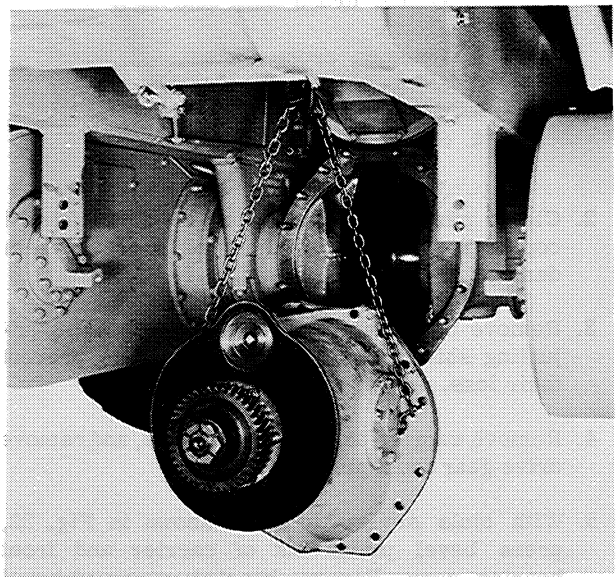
Removing Cross Shaft Housing Assembly (T-39437)
